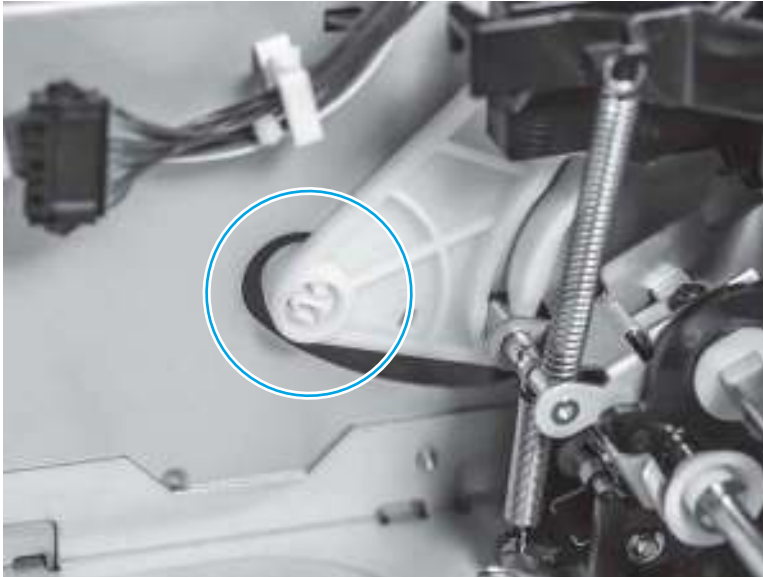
Reinstall the cartridge-lifter assembly (M806; 4 of 6)
